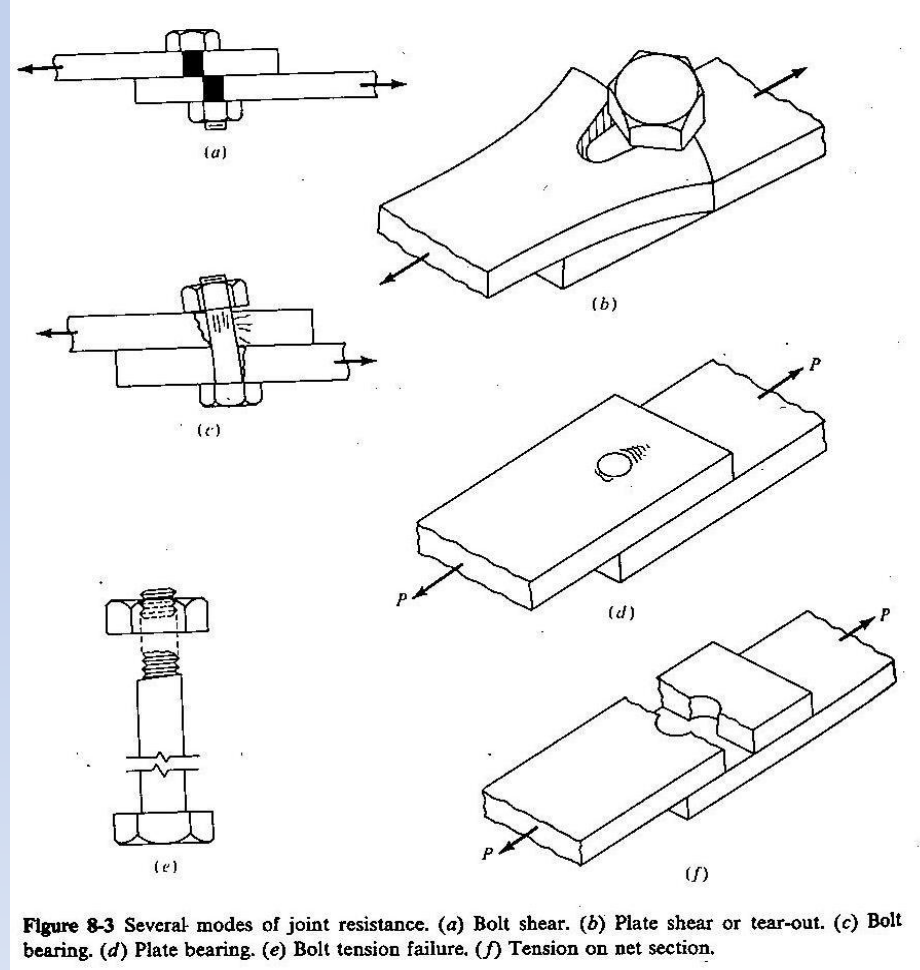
Several modes of joint resistance. (a) Bolt shear. (b) Plate shear or tear-out. (c) Bolt bearing. (d) Plate bearing. (e) Bolt tension failure. (f) Tension on net section.
